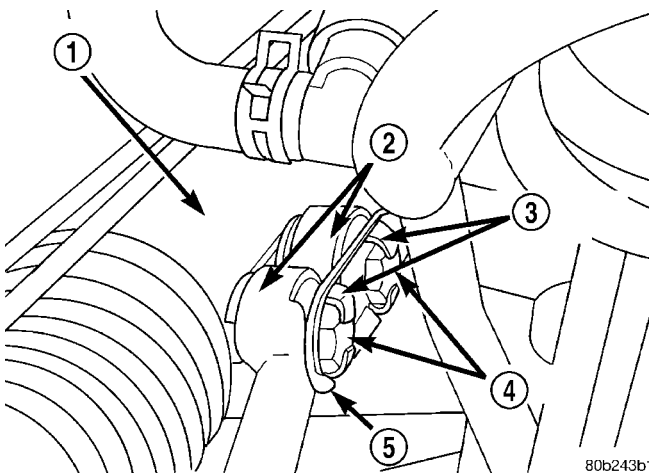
Tie Rod Attachment Bolt Retaining Tabs
